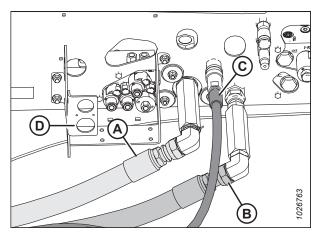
Hard-Plumbed Hydraulic and Electrical Connections on a Rotary Disc Ready Windrower
